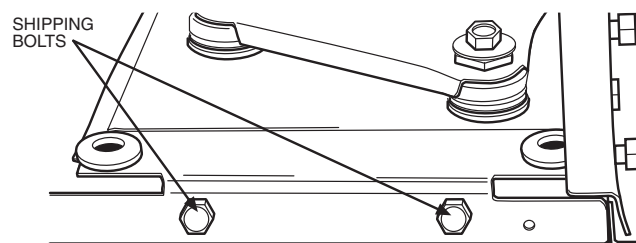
Remove 4 Shipping Bolts on Compressor Isolator Plate
